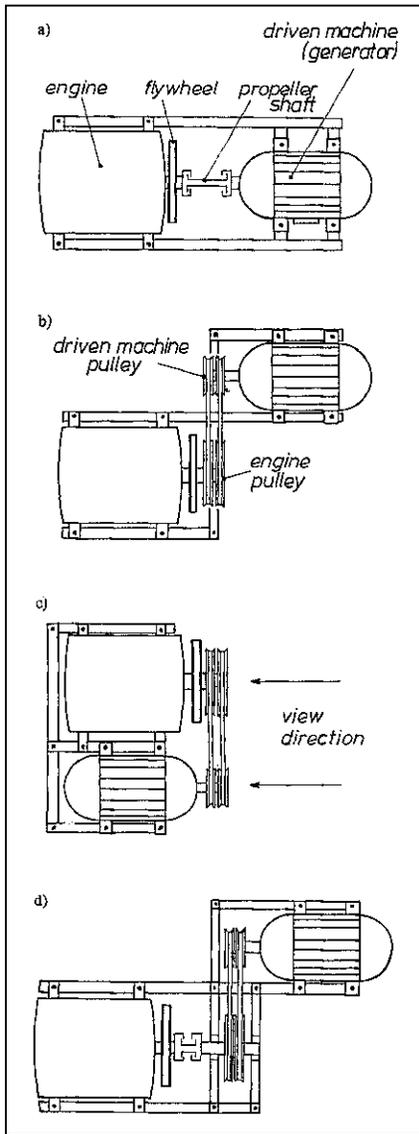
Alternative positioning of engine and driven machine depending on direction of rotation and type of transmission. Direction of rotation is given as viewed facing the shaft ends, example c).
